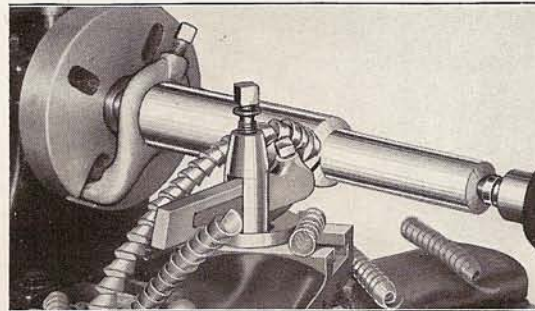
Close-up of the 16-inch Lathe Reducing the Diameter of a Steel Bar 3/4-inch in One Cut.
